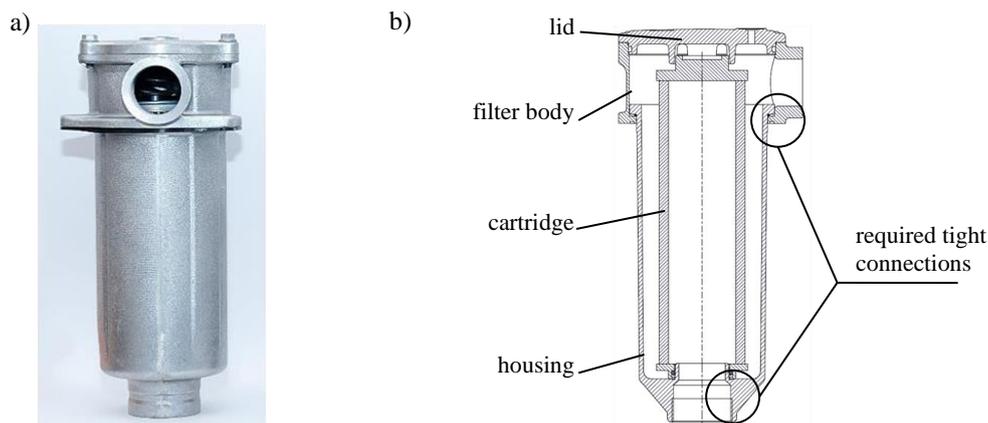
Oil filter: a) with an aluminium housing; b) with a housing made of pressed polyamide
